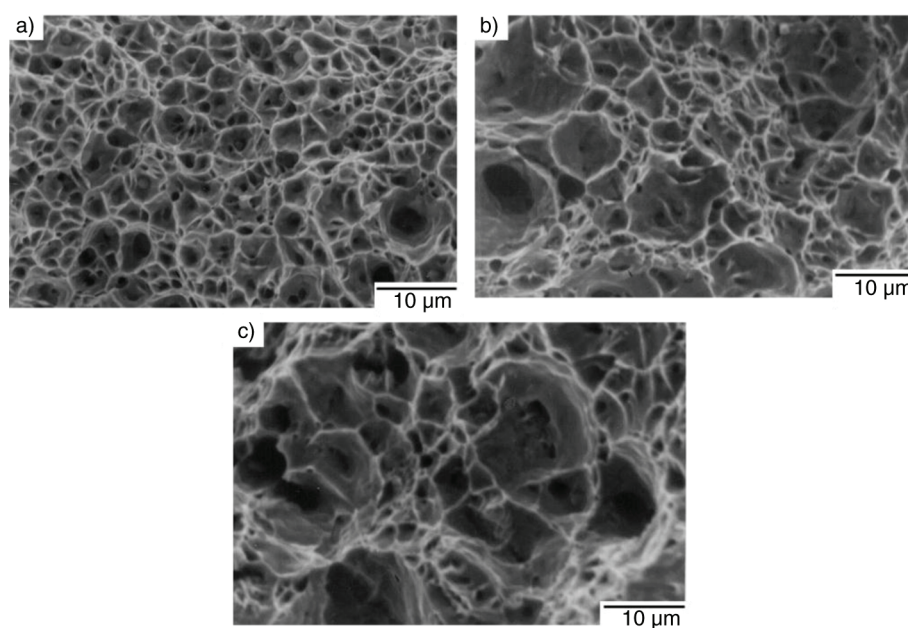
Fractography of tensile fractured specimens for the welded joint naturally over-aged state: (a) weld bead, (b) HAZ and (c) base metal, with different density and diameter of micro-void within surface.
